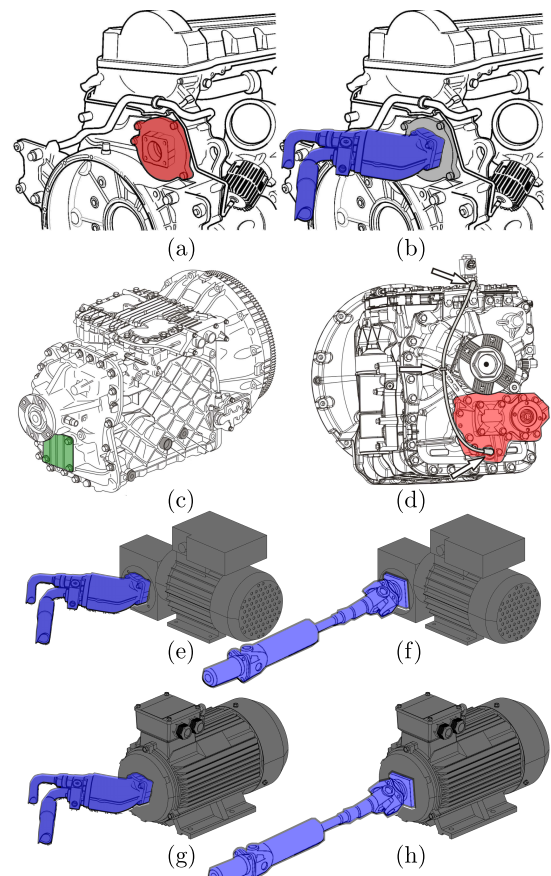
a) Diesel engine rear PTO mount; b) diesel engine with mounted hydraulic pump; c) Transmission with direct PTO mount; d) transmission with geared PTO [69]; geared PTO propelling hydraulic pump e) and universal joint shaft f); direct PTO propelling hydraulic pump g) and universal joint shaft h).
